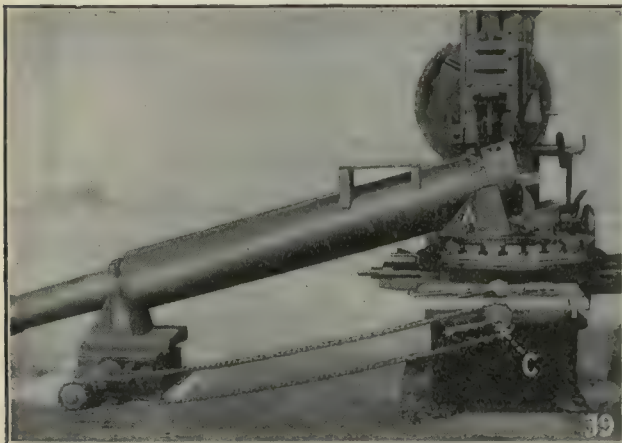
INCLINED CARRIAGE FOR ANGLE WORK ON VERTICAL SLOTTING MACHINE
